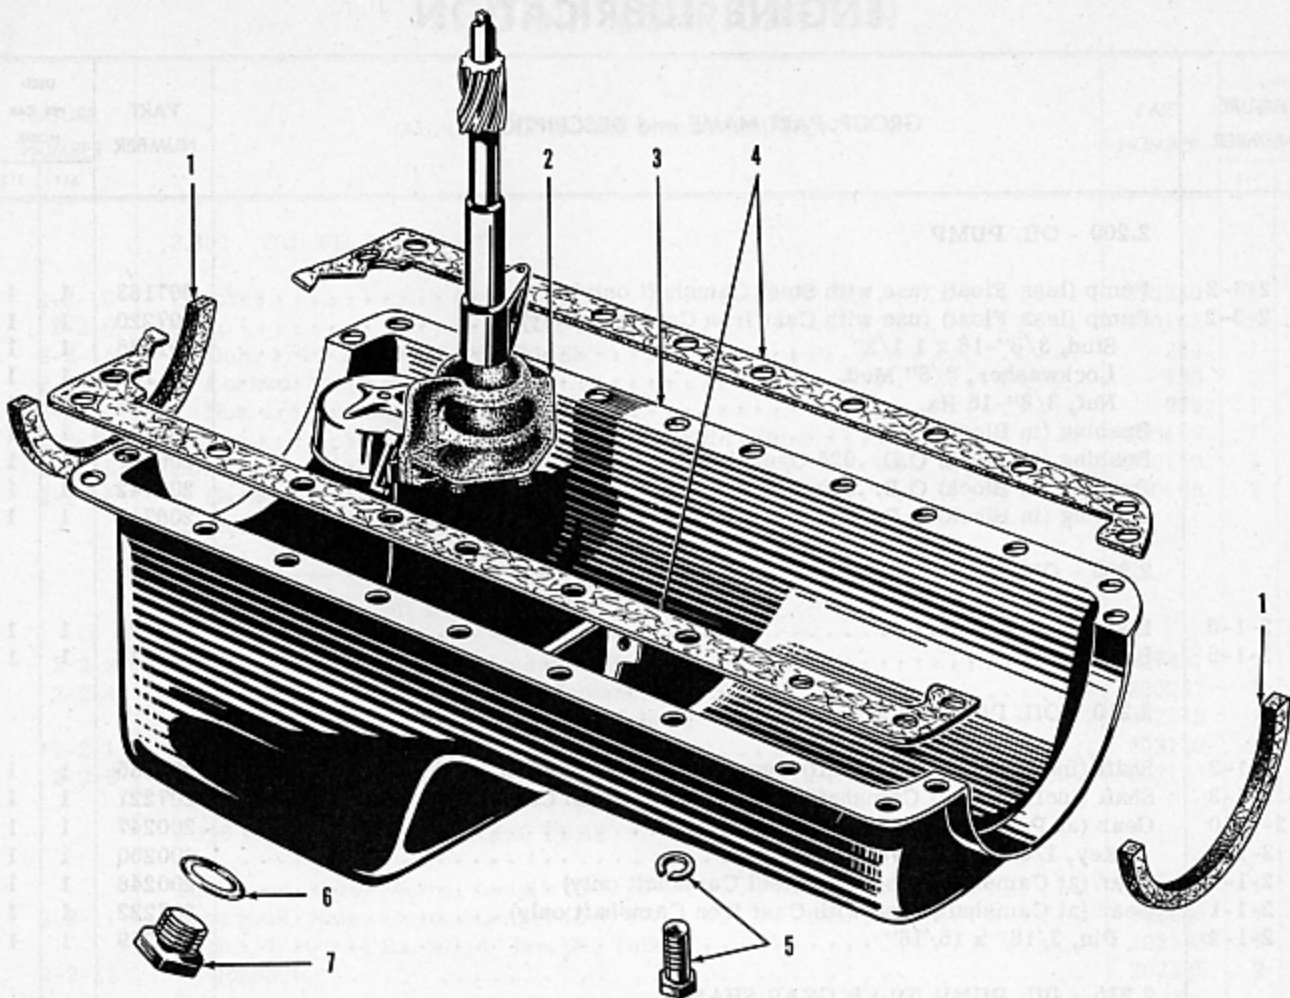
OIL PAN - EXPLODED VIEW
